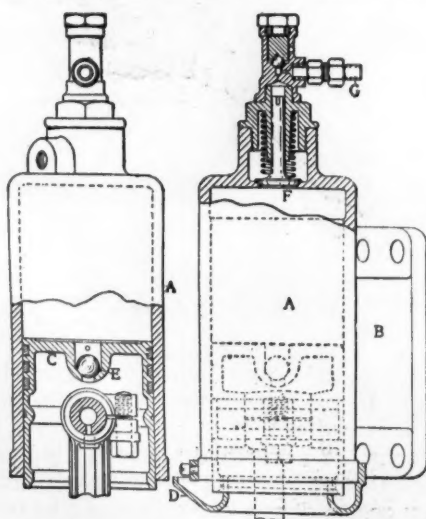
Air compressor on Northern car for pumping up air for braking purposes
